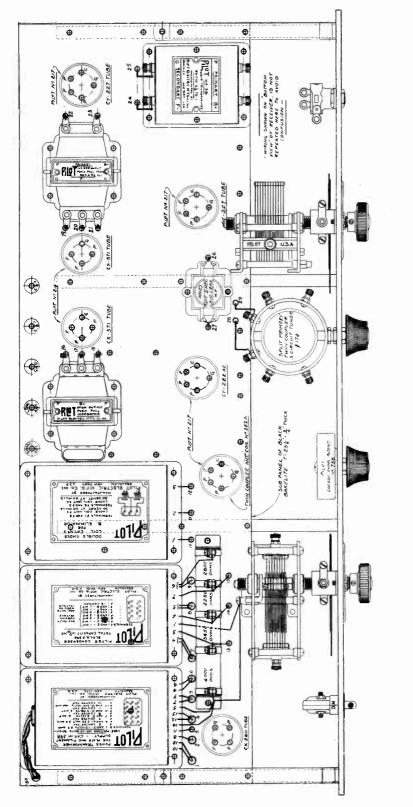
It is best to mount all of the parts underneath the sub-panel first, for some of the resistors and fixed condensers screw heads and nuts will be underneath the "jumbo" power transformer, filter condenser, and choke coils when these units are assembled in place on top of the sub-base panel.
